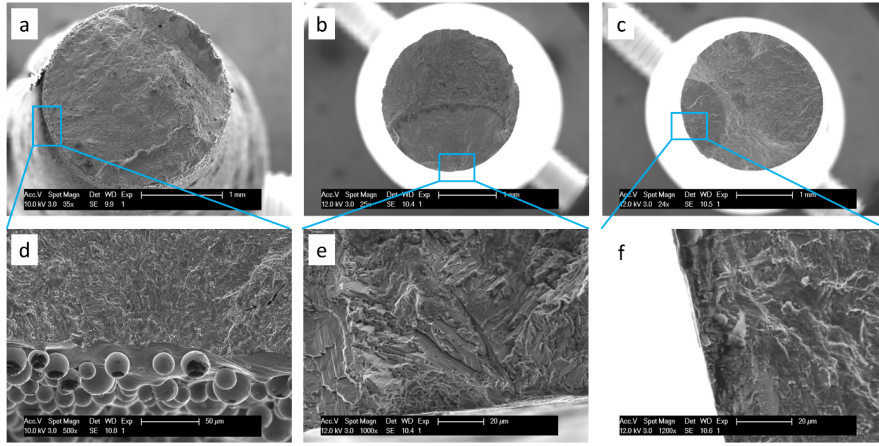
Fracture surfaces of stress relieved samples in non-machined (a) and (d), EPP (b) and (e), and machined (c) and (f) conditions
